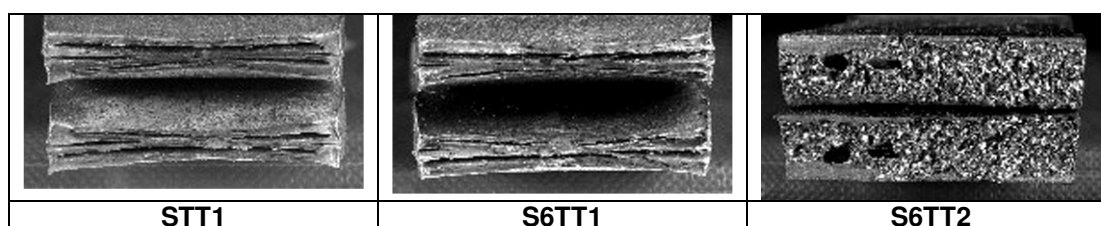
Fractographs of STT1, S6TT1 and S6TT2 specimens.
